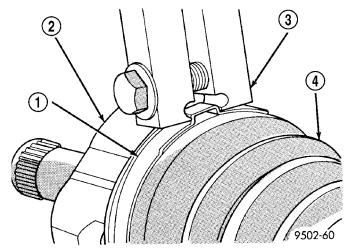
Crimping Tool Installed on Sealing Boot Clamp
